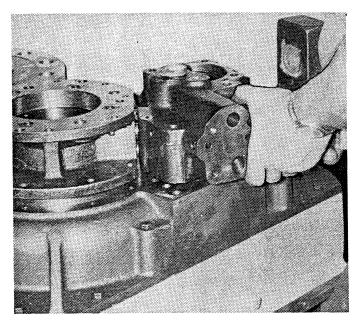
Removing or Installing Valve and Filter Carrier Assembly and Forward Shaft Collector.
